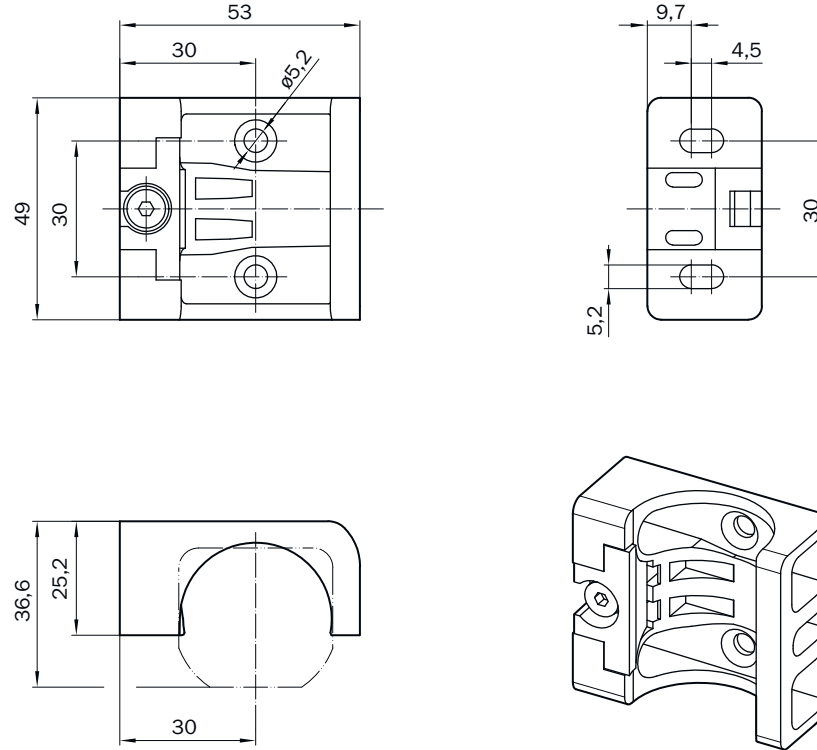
Dimensional drawing of the Compact FlexFix bracket
